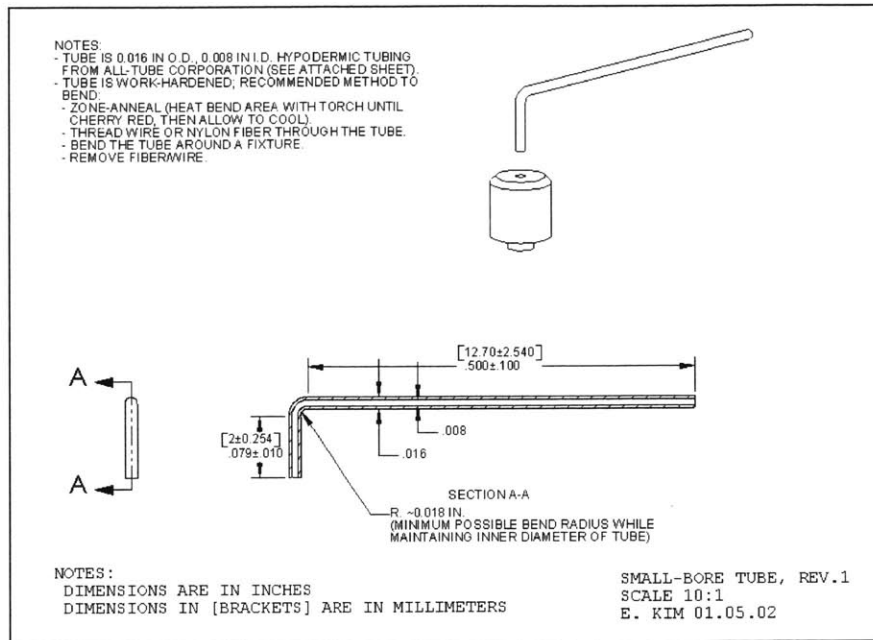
Machine drawing for small-bore fluidic fitting, tube
